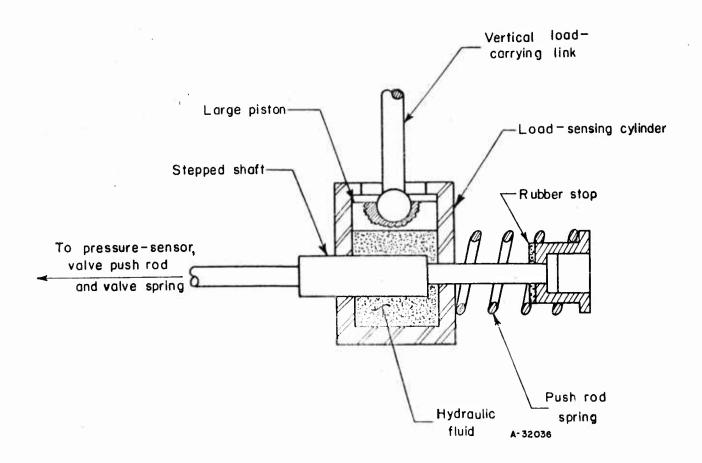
SCHEMATIC DRAWING OF LOAD-SENSING CYLINDER
